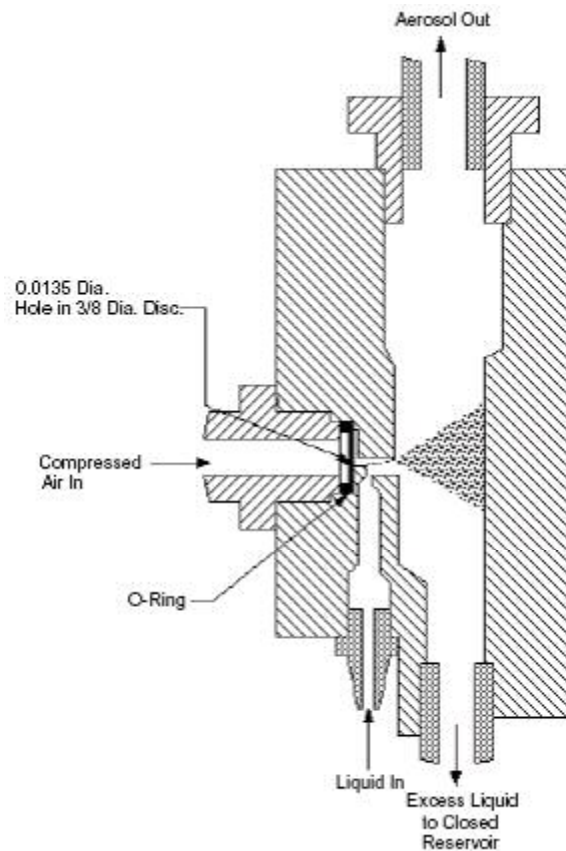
TSI 3075/3076 atomizer assembly [32].
